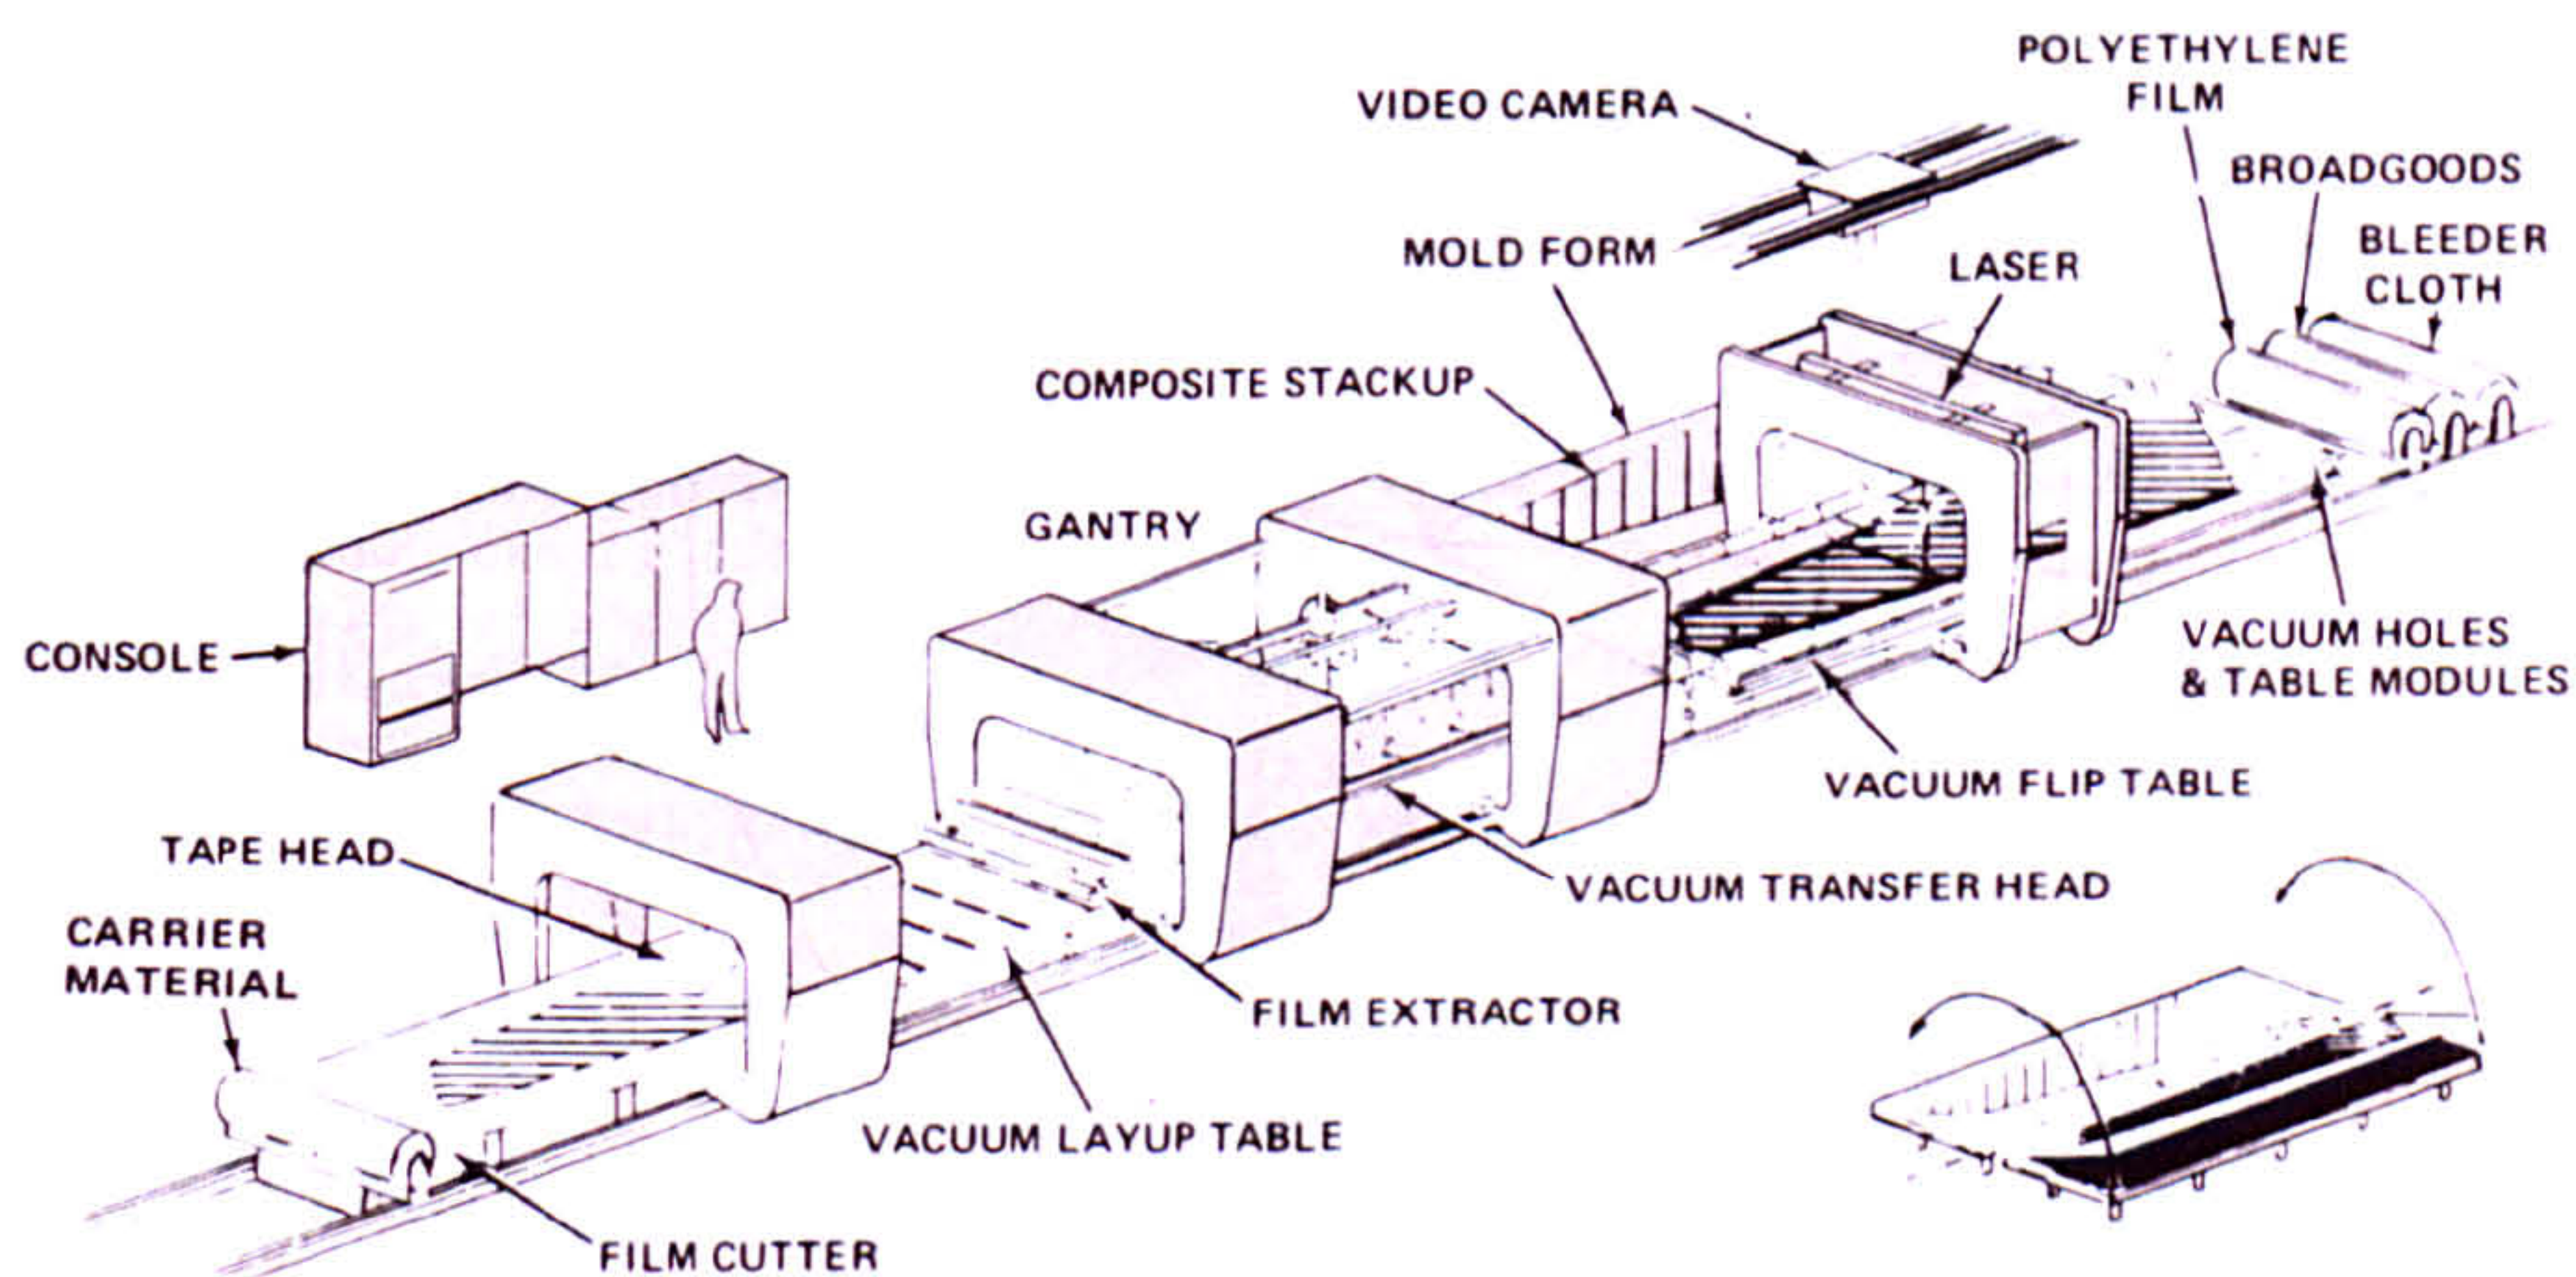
Drawing of an early automated composite components manufacturing system from [24]. The material is moved from left to right and material is applied to a mould using a bespoke tape layup head.
